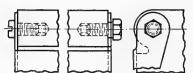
Sheet-iron cover with hinge ears fastened with shouldered hex head stud or fillister head screws.
